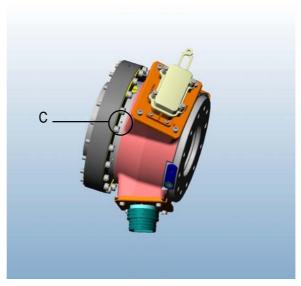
Seven holes C, on a radius of x mm from axis 6 center on the flange for IRB 6600ID/IRB 6650ID.
